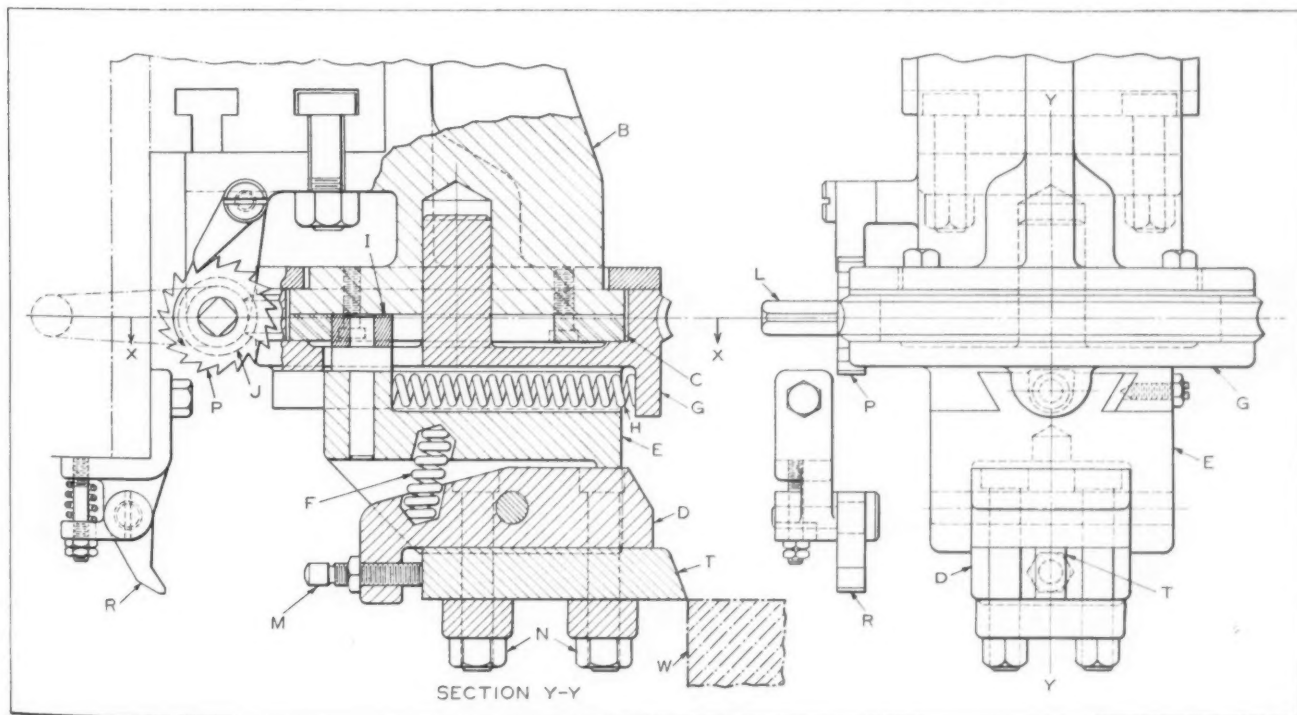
Attachment Used on Slotting Machine for Forming Profile Indicated by Dot-and-dash Line *A*, Fig. 2
